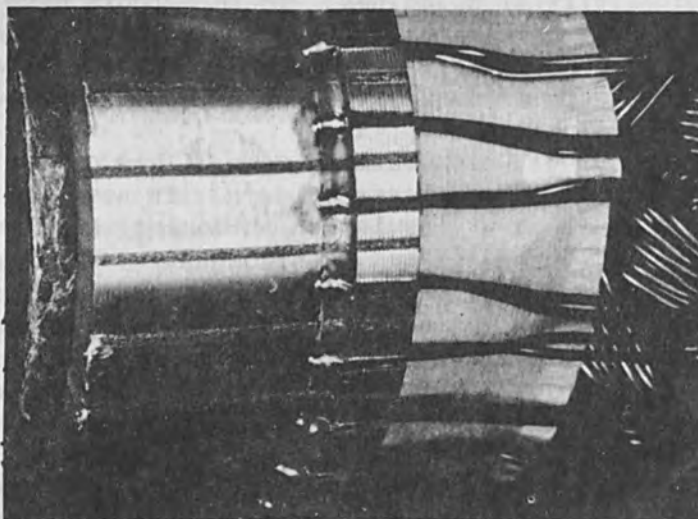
Weldments of coil wires to commutator segments in electric motor. Welds were produced with pulsed YAG laser.
